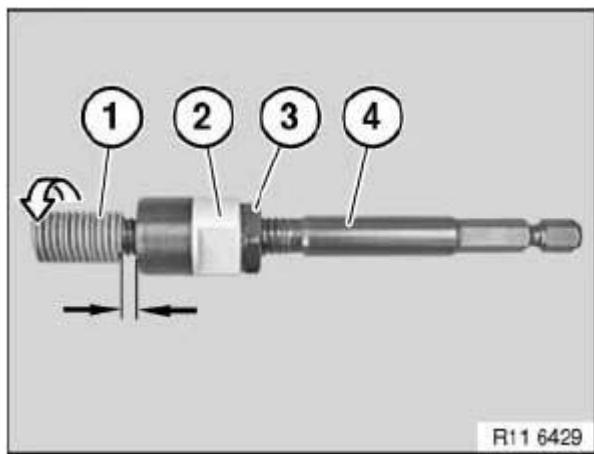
Identifying Spacer, Lock Nut, Helicoil-Plus And Helicoil
